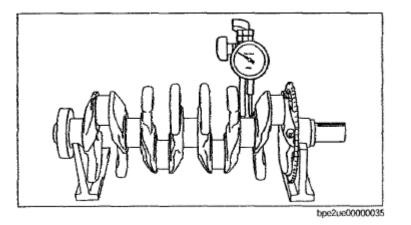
Measuring Main Journal Runout Using Dial Gauge
